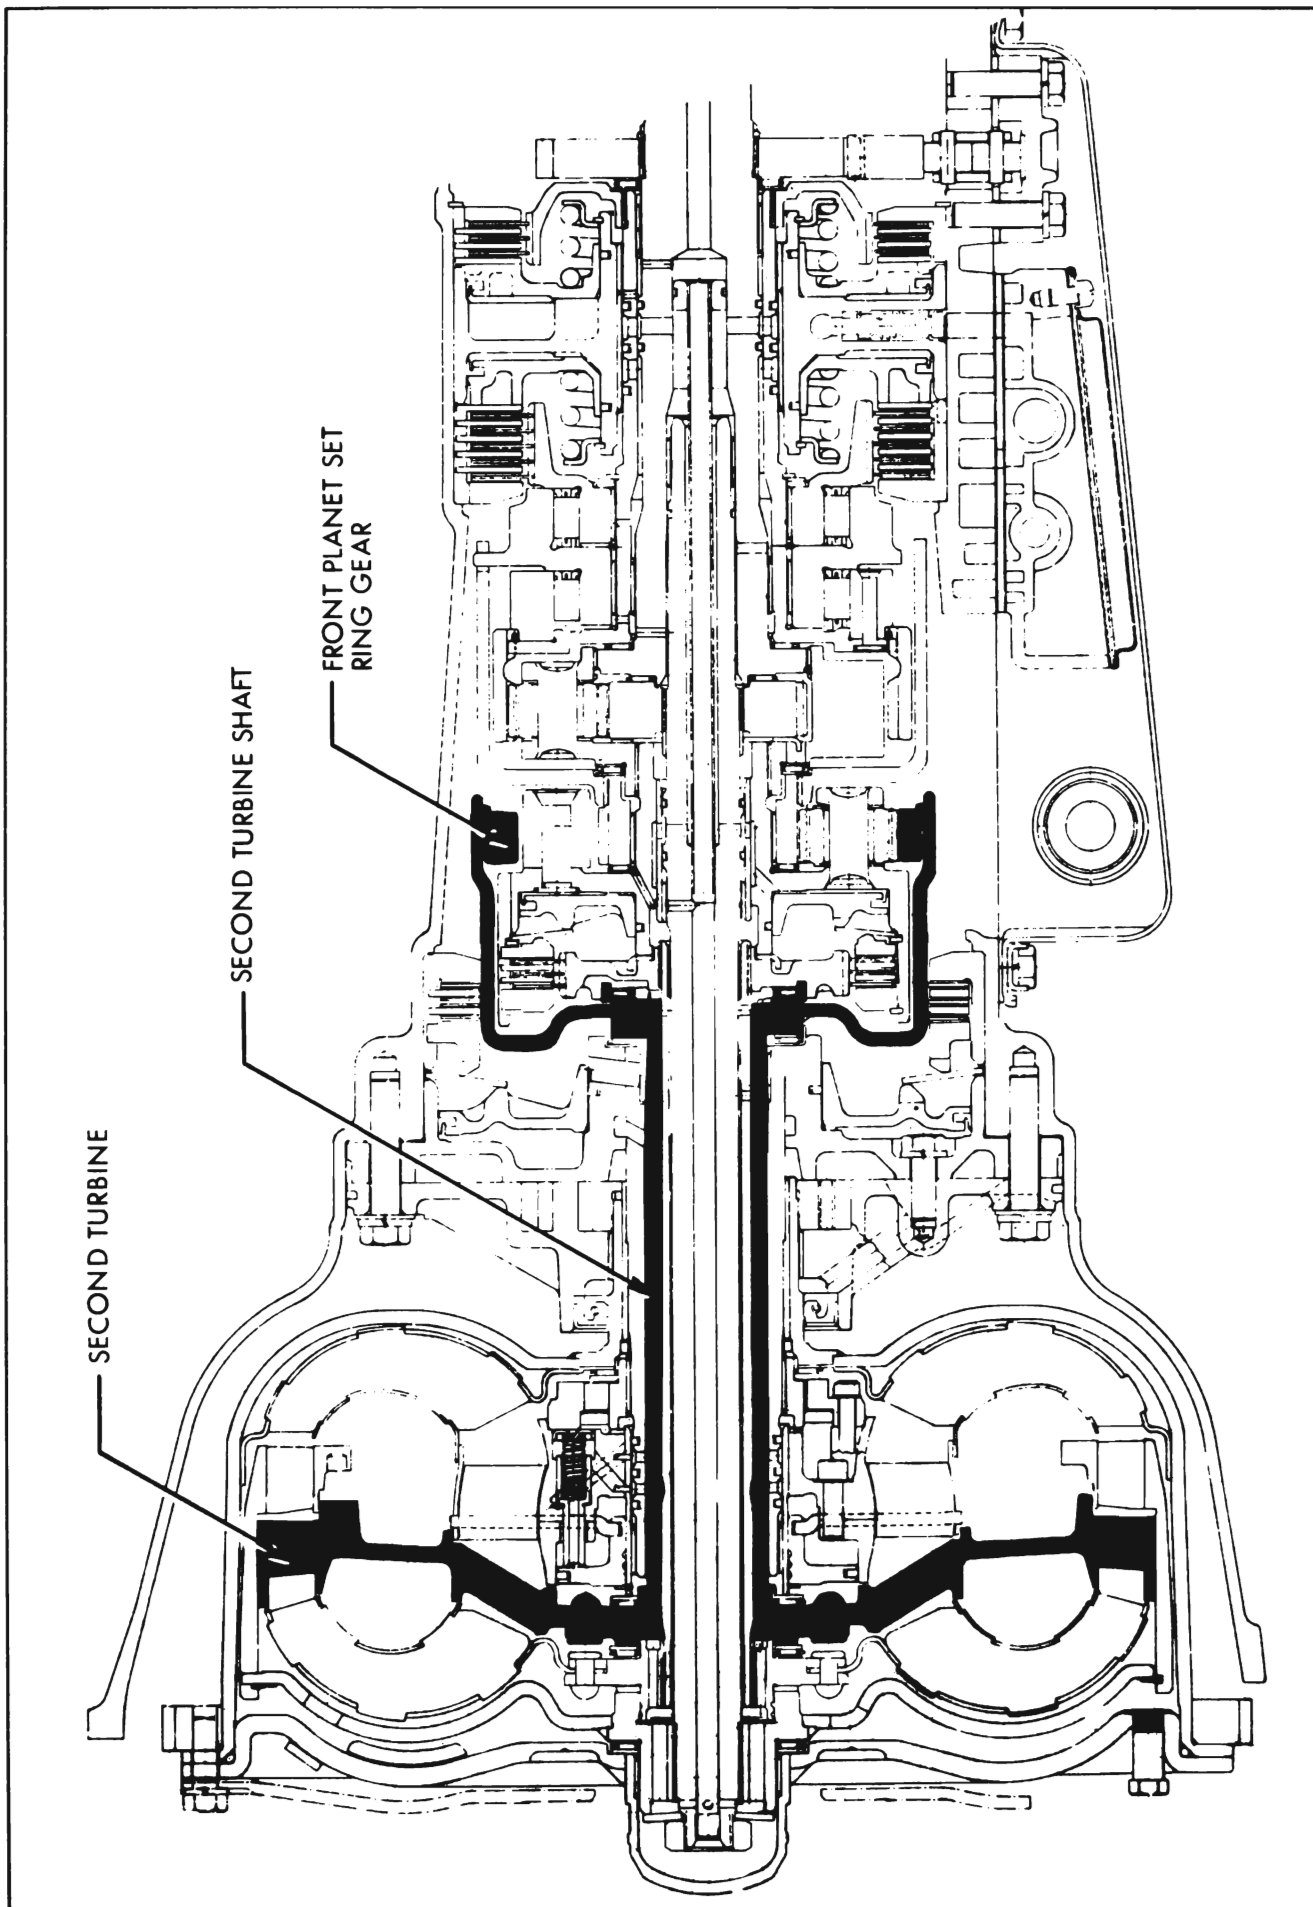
Second Turbine, Second Turbine Shaft, Front Planet Set Ring Gear and Reverse Clutch
